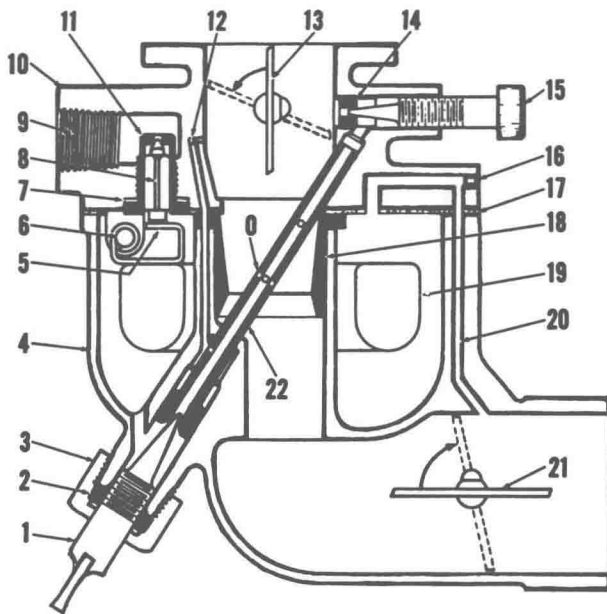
Cross-sectional drawing of float type carburetor used on a popular small engine.
